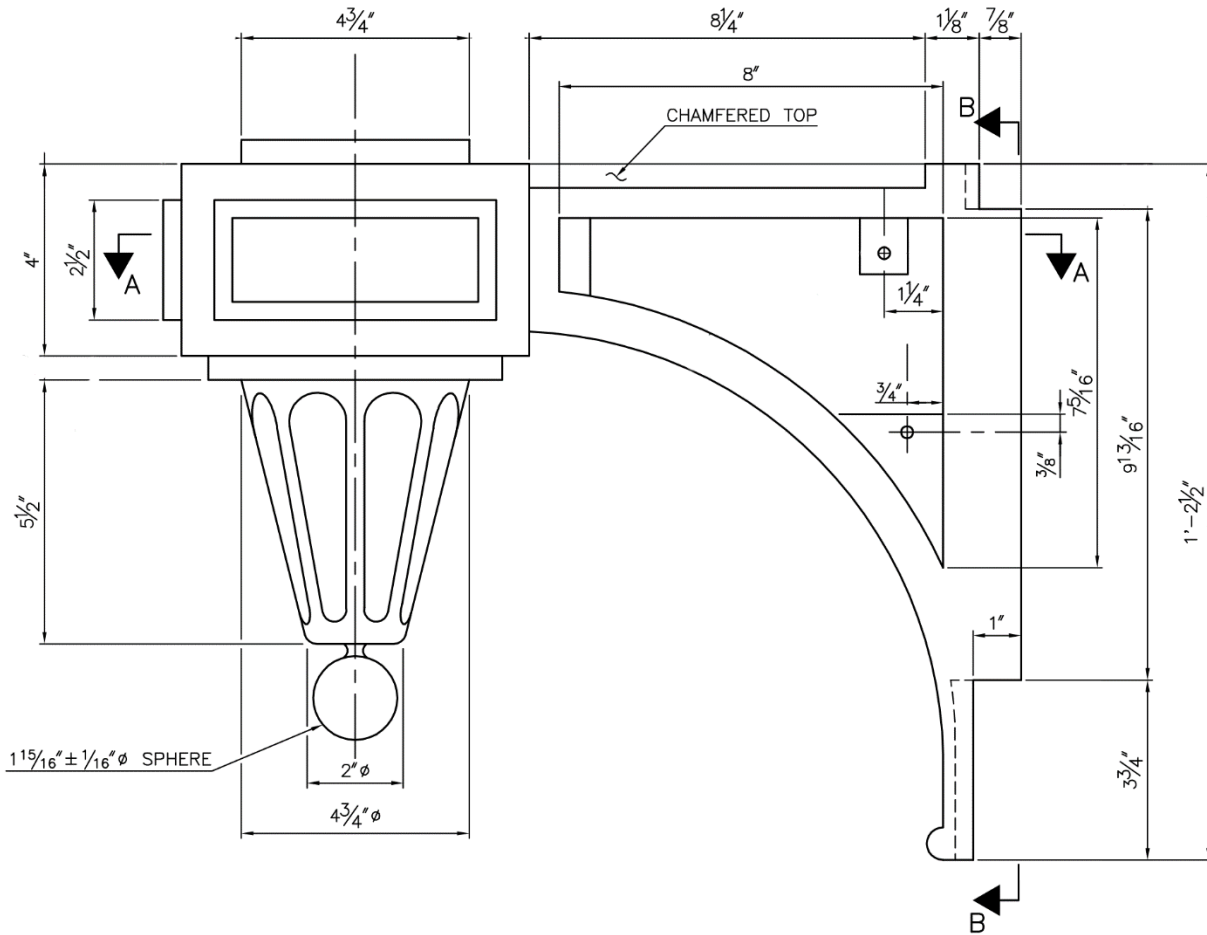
Bracket Arm Detail, Dimensions, Nominal (Top View)
